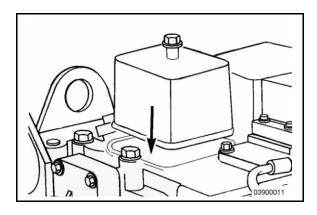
INSTALL THE ROCKER LEVER COVERS
